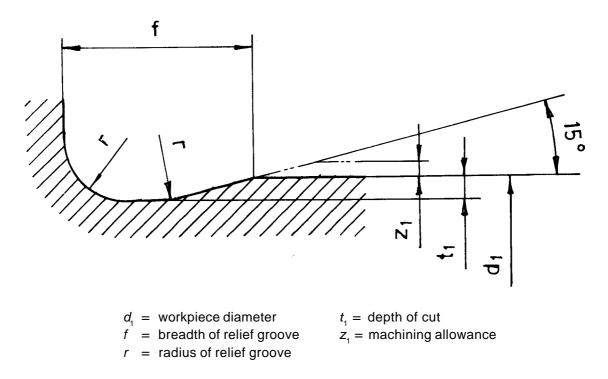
Relief Groove for Cylindrical Surface to be Machined Further
